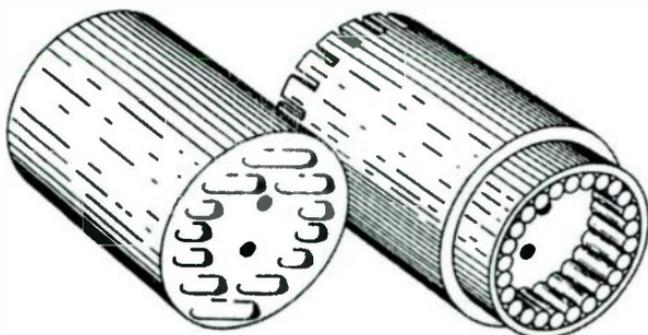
Section of Motor-Alternator Shield Before and After Modification
